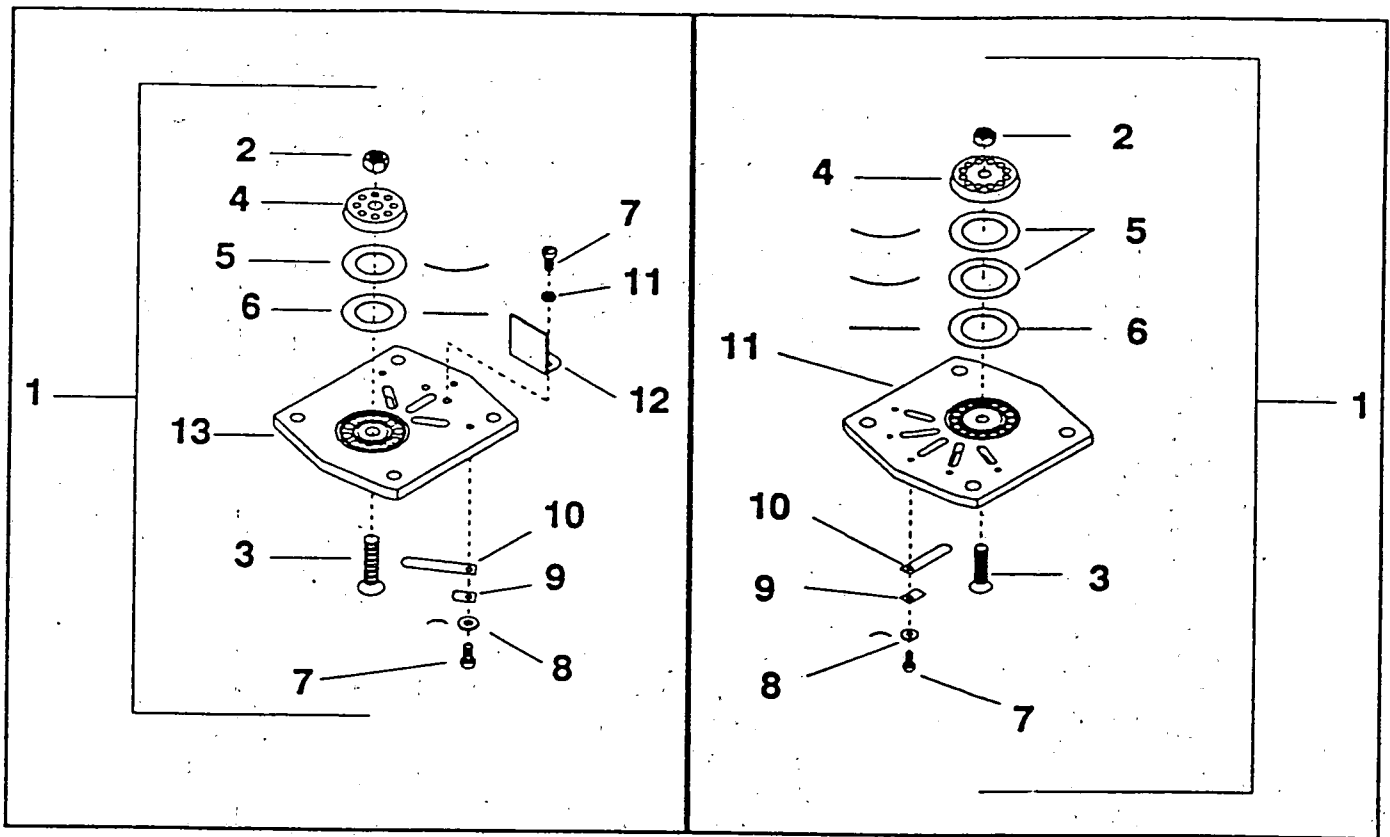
HIGH PRESSURE VALVE ASSEMBLY FIGURE 4 LOW PRESSURE VALVE ASSEMBLY
